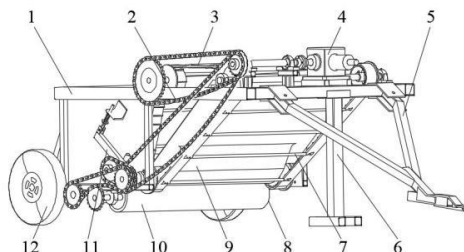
Schematic of the horizontal-shaft roller-type cotton stalk puller structure
